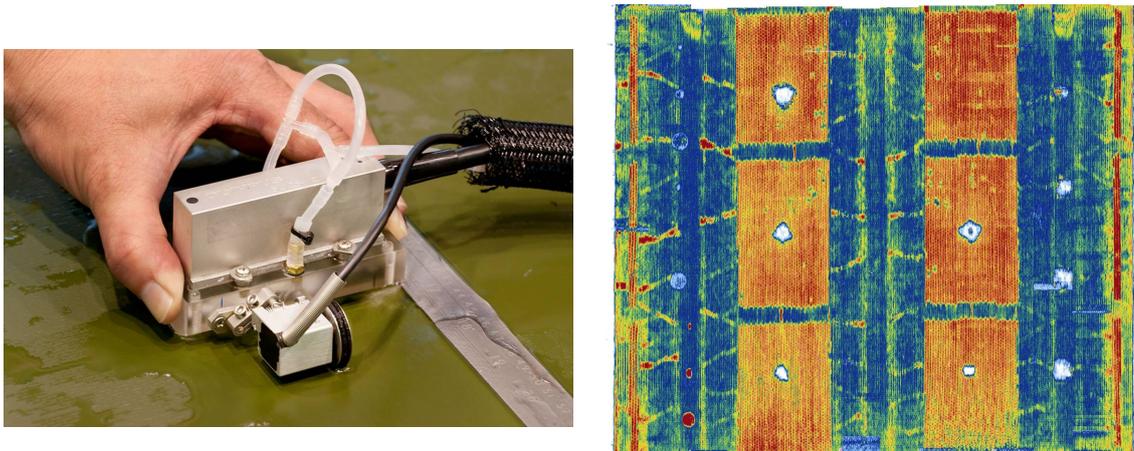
UT phased array inspection of panel NTP-D (chamfered sandwich structure with 3 L-shaped stiffeners)
